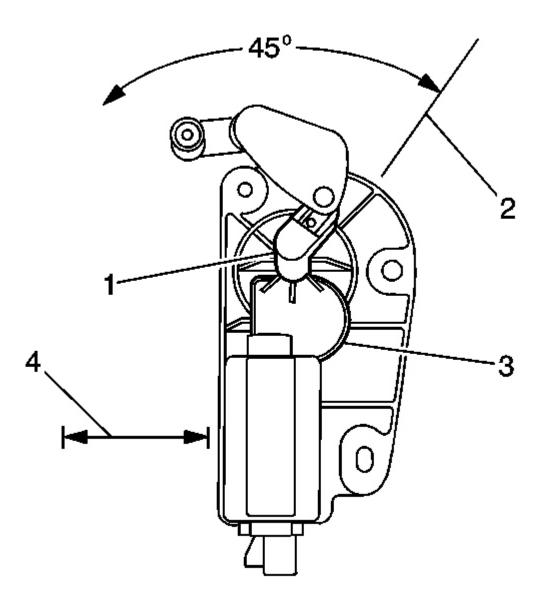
View Of Window Side Sheet Metal & Bellcrank At 45 Degree Angle Courtesy of GENERAL MOTORS CORP.
